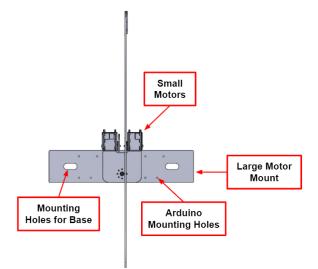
Side view of the arm system. The large motor/arduino mount connects the arm system to the base via the slotted mounting holes. The large motor/arduino mount also supports the arduino and other controller components.
